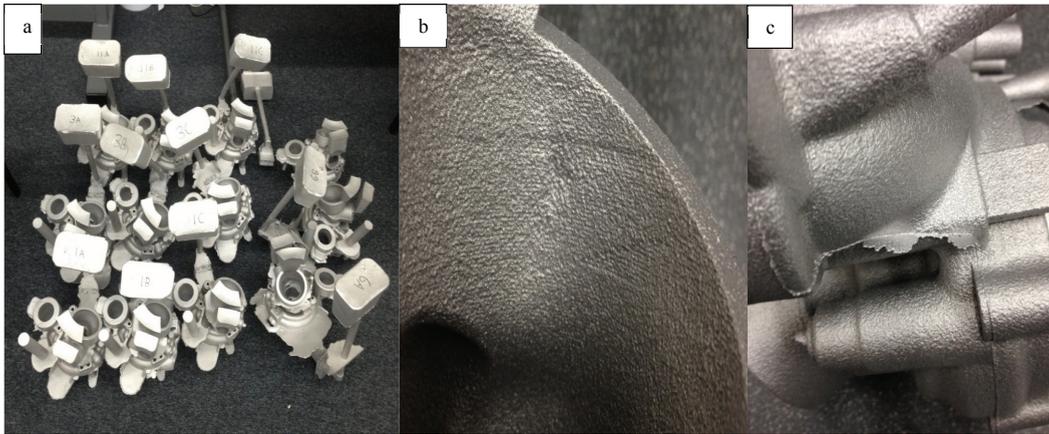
(a) Castings as delivered, (b, c) Example of casting quality on the housing of part 11-B representative of both 11B and 11C
